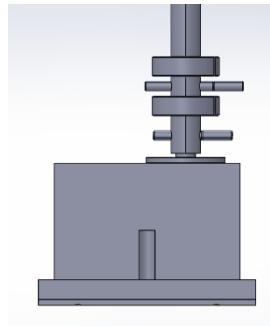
Servo Motor + Shaft Rod + Custom-made "shaft rod linkage"
